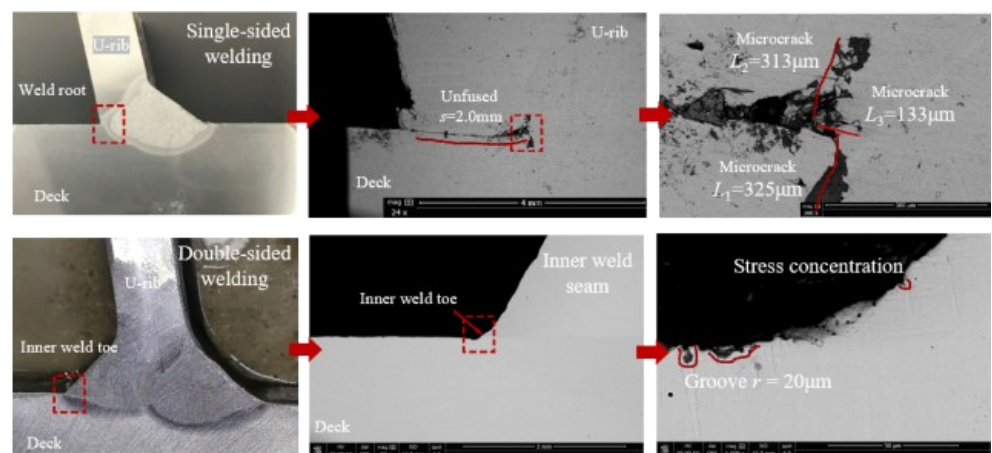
Comparison of the technical quality of single-sided welding and automated double-sided submerged arc welding
